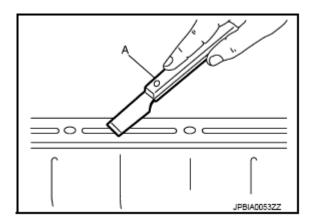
Removing Liquid Gasket Using Scraper Courtesy of NISSAN NORTH AMERICA, INC.
